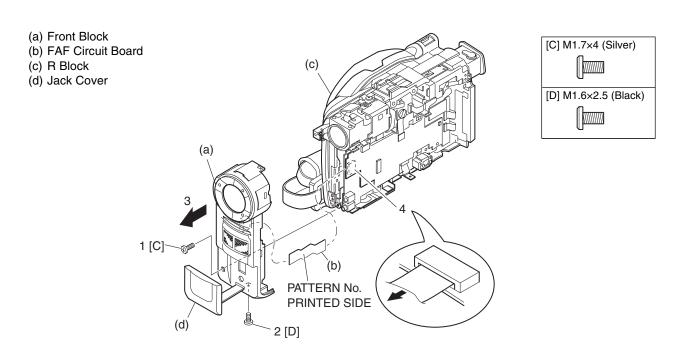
Front Block, FAF Circuit Board, and R Block
